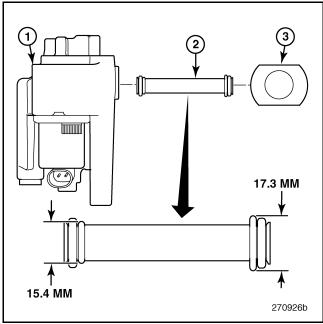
Engine Brake Control Valve Oil Tube Orientation (MP7 Only)
